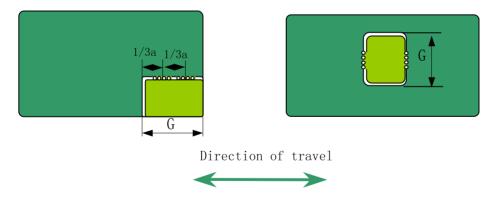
Stamp hole placement for filler pieces greater than 50mm in length.
